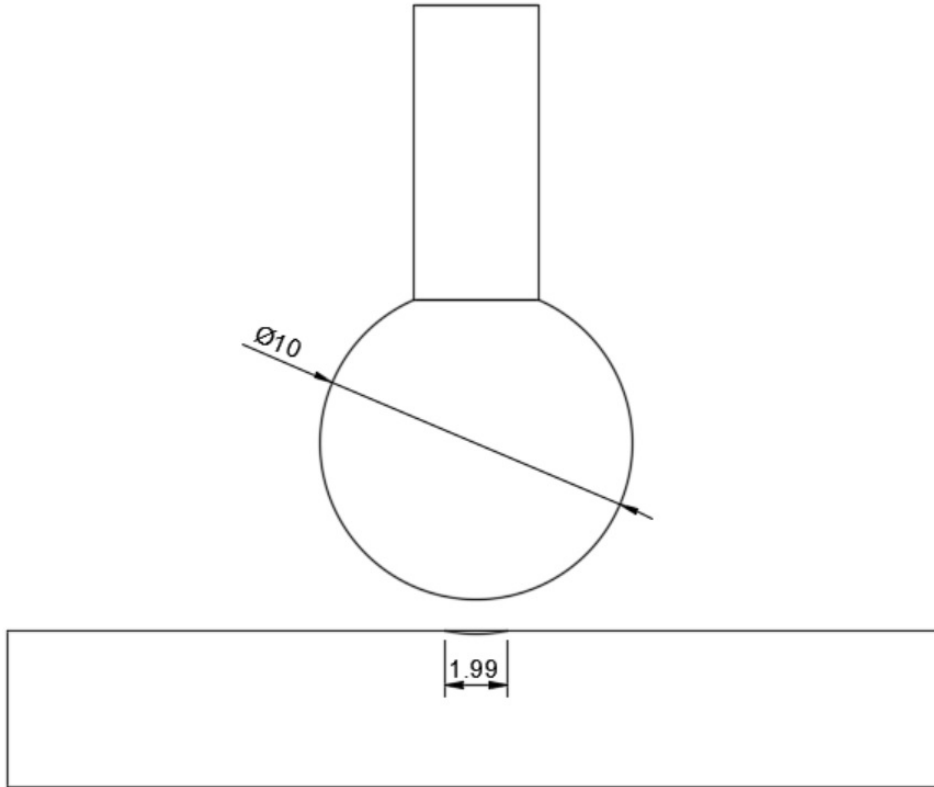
The dimensions of the ball cutter and the dimple in mm.
